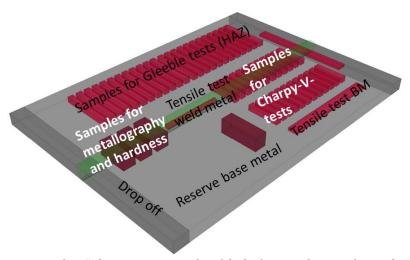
Schematic view of welded plate with sample grid.
